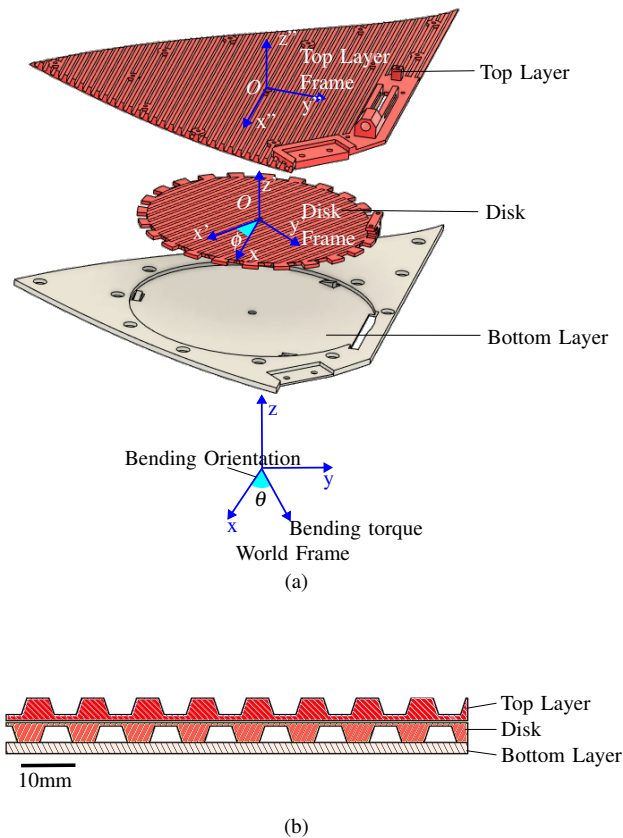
Adjustable-stiffness pectoral fin. (a) Overview of the three main components: top layer, disk, and bottom layer. (b) Section view of the fin assembly, showing the thickness of each part and the dimensions of the stripes.
